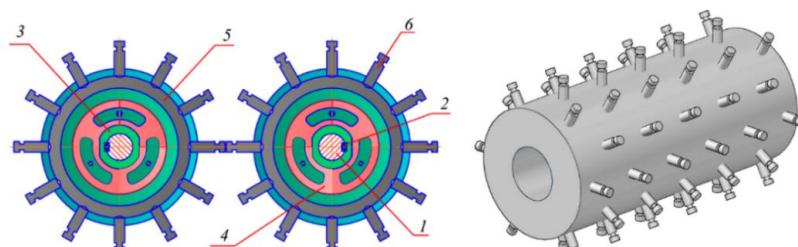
Appearance of the pinned drum and pins in the wool shaking-cleaning equipment;
